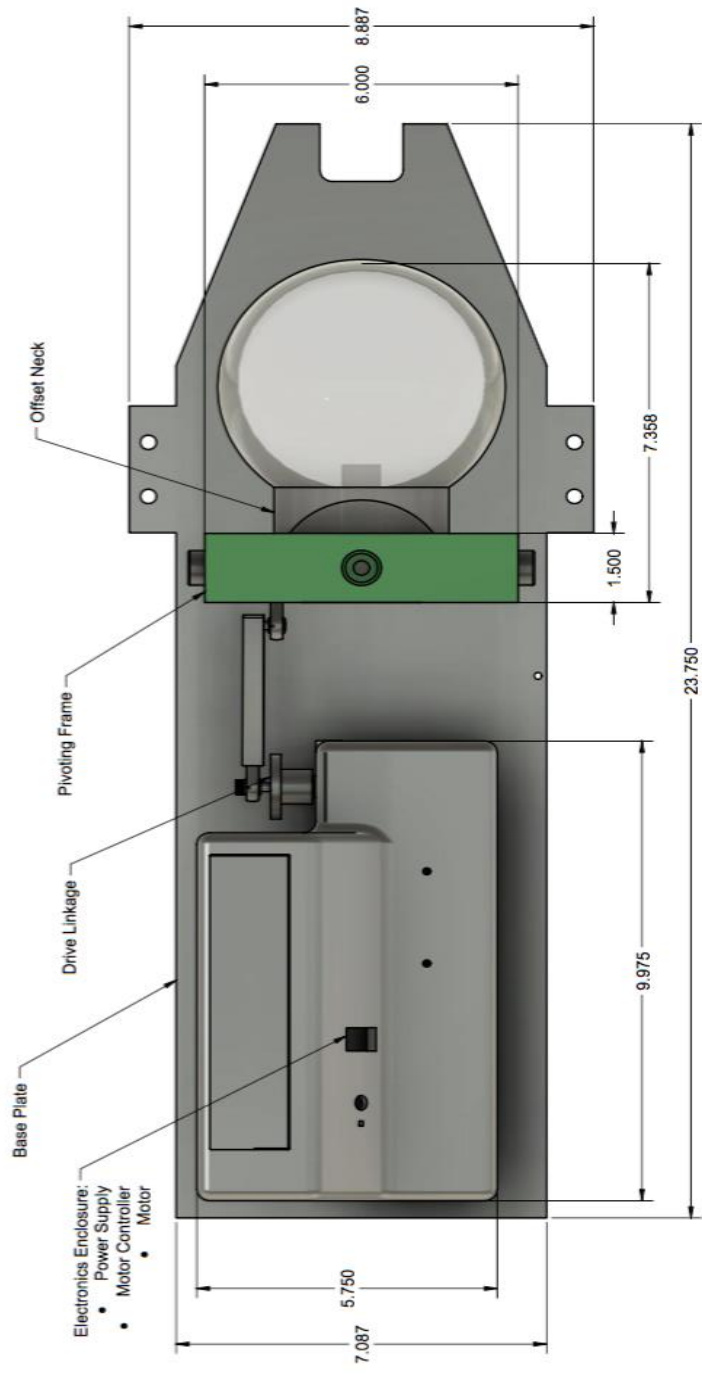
Drawing of the phantom platform device (overhead view) with dimensions given in inches
